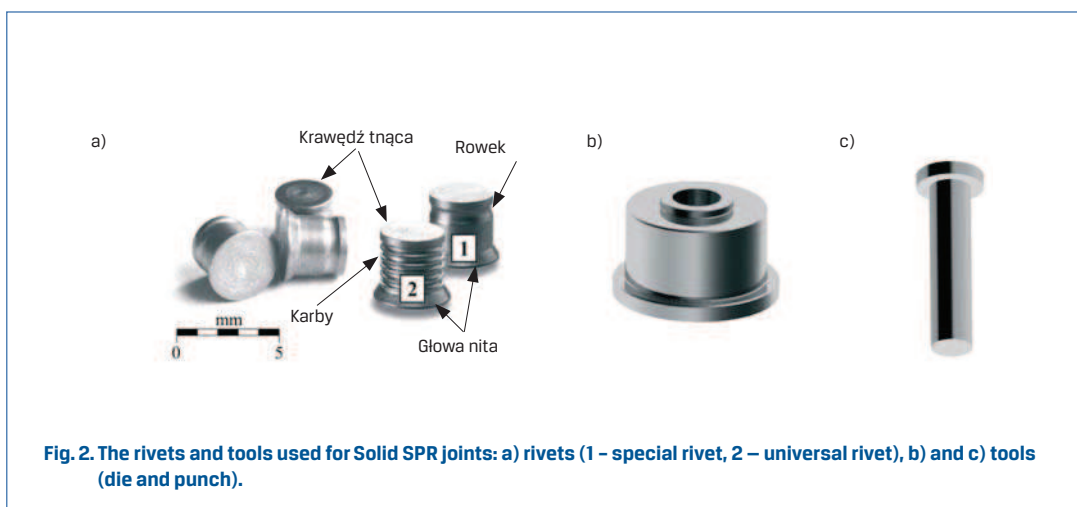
The rivets and tools used for Solid SPR joints: a) rivets (1 - special rivet, 2 - universal rivet), b) and c) tools (die and punch).
